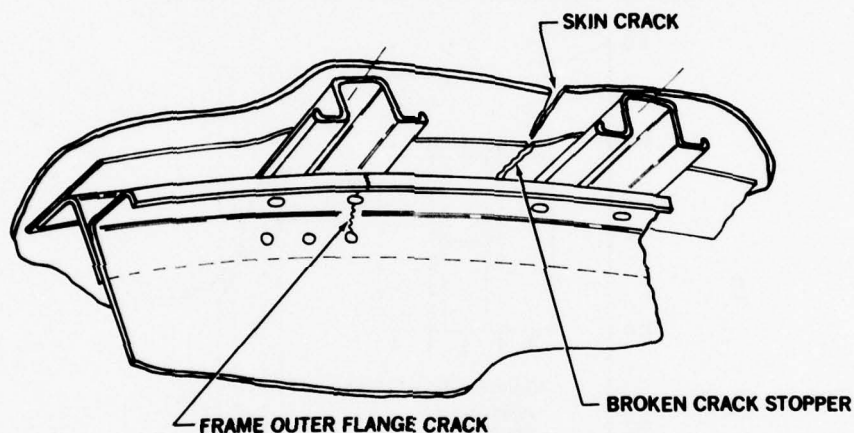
FATIGUE CRACK IN OUTER FRAME ARREST IN RIVET HOLE
